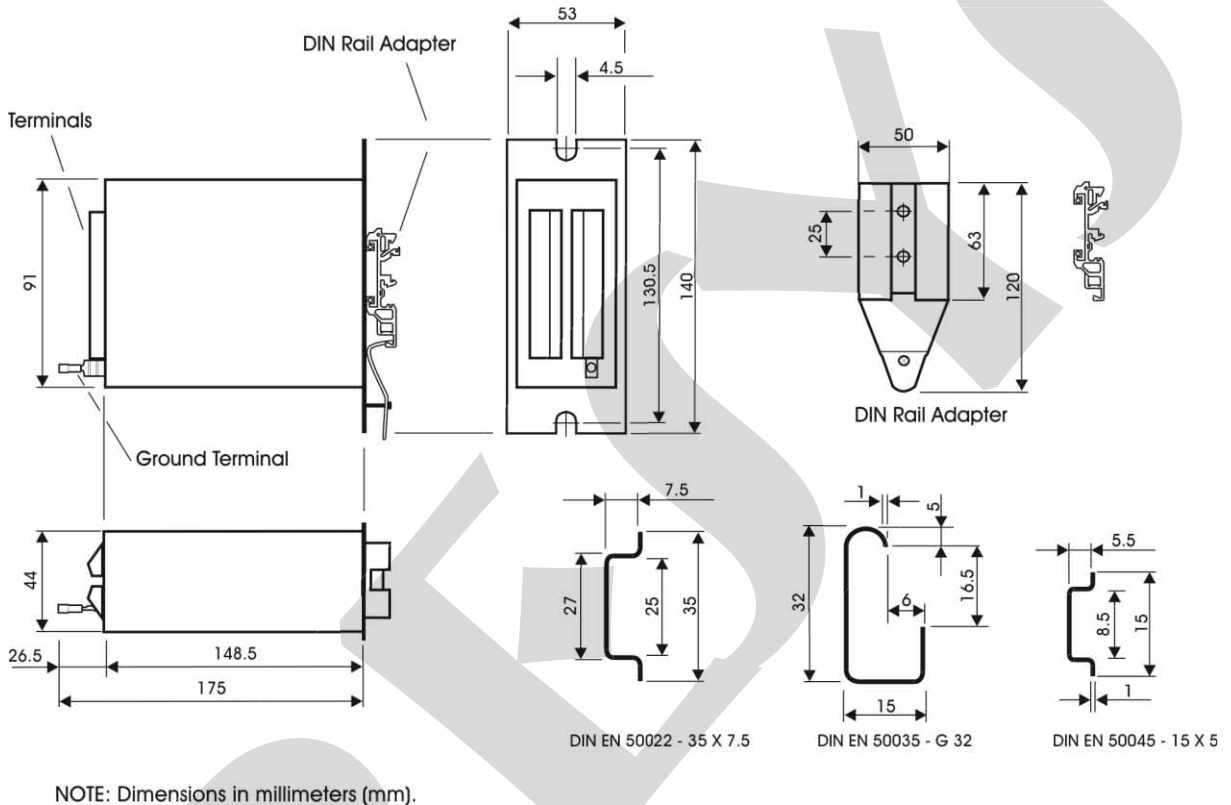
Dimensional drawing and detail of the adapter for DIN rail
